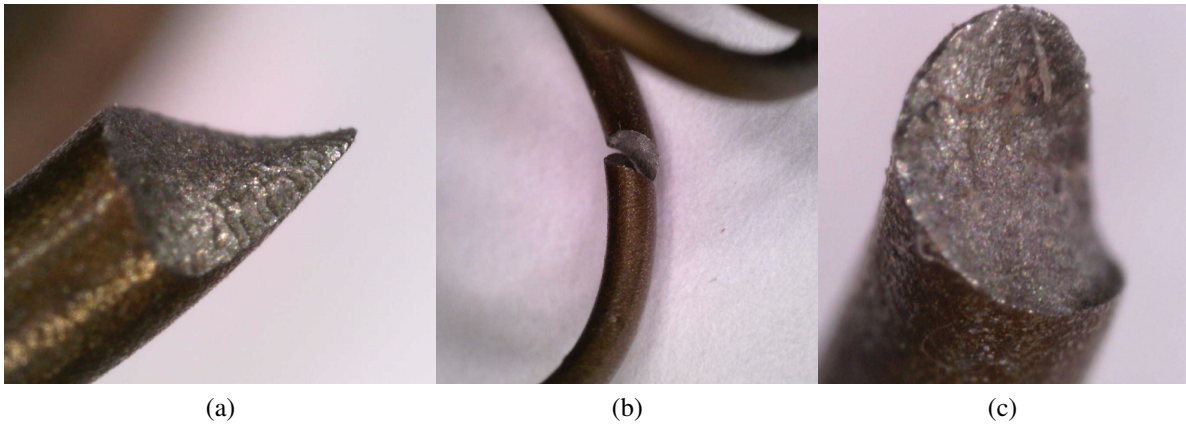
Close up images of the fractured first spring. This was the only fracture that occurred.
